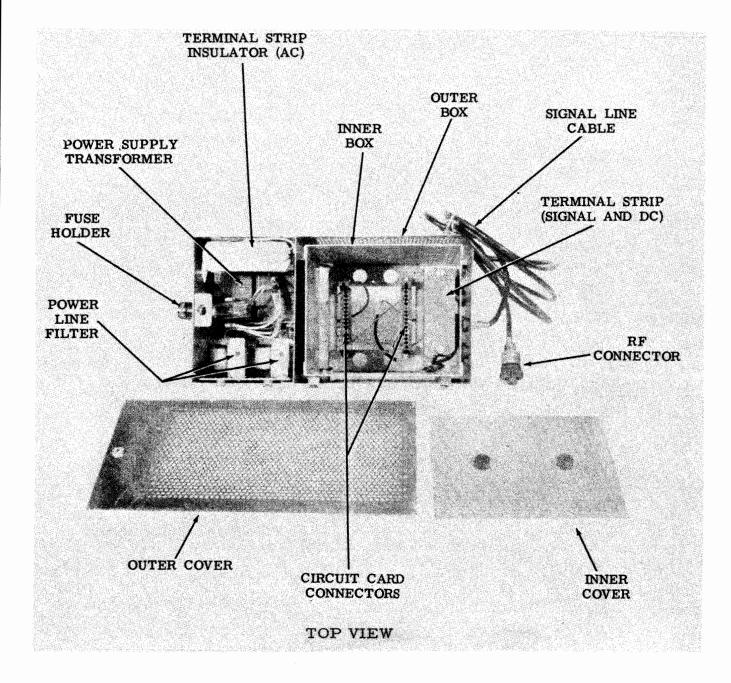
Typical Parts of an ESA - Double Box Construction (Sheet 1 of 2)
